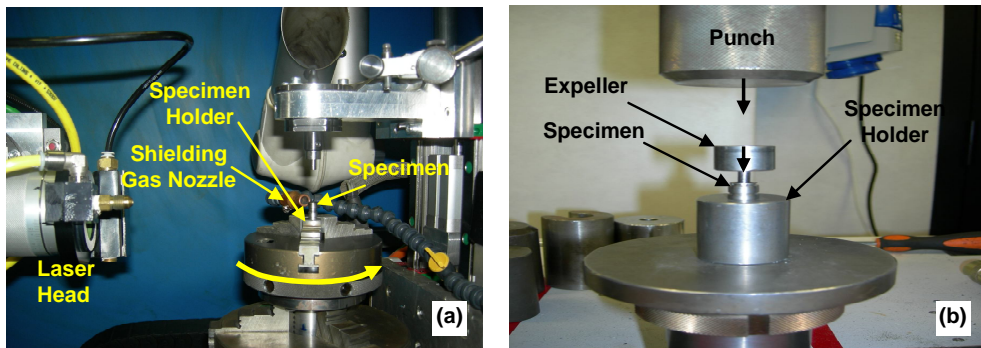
Photographic views of the experimental set-up for (a) laser welding and (b) shearing test
